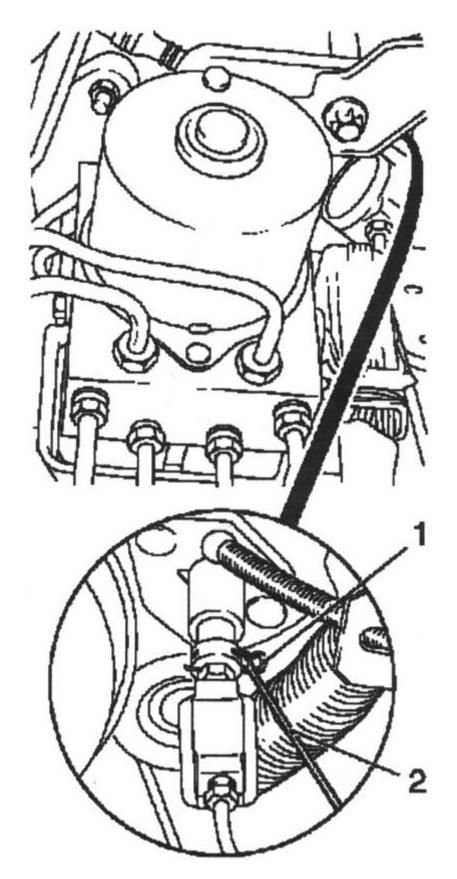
Withdrawal restraint Homa-ta: 1 - holding the collar 2 - Screwdriver
